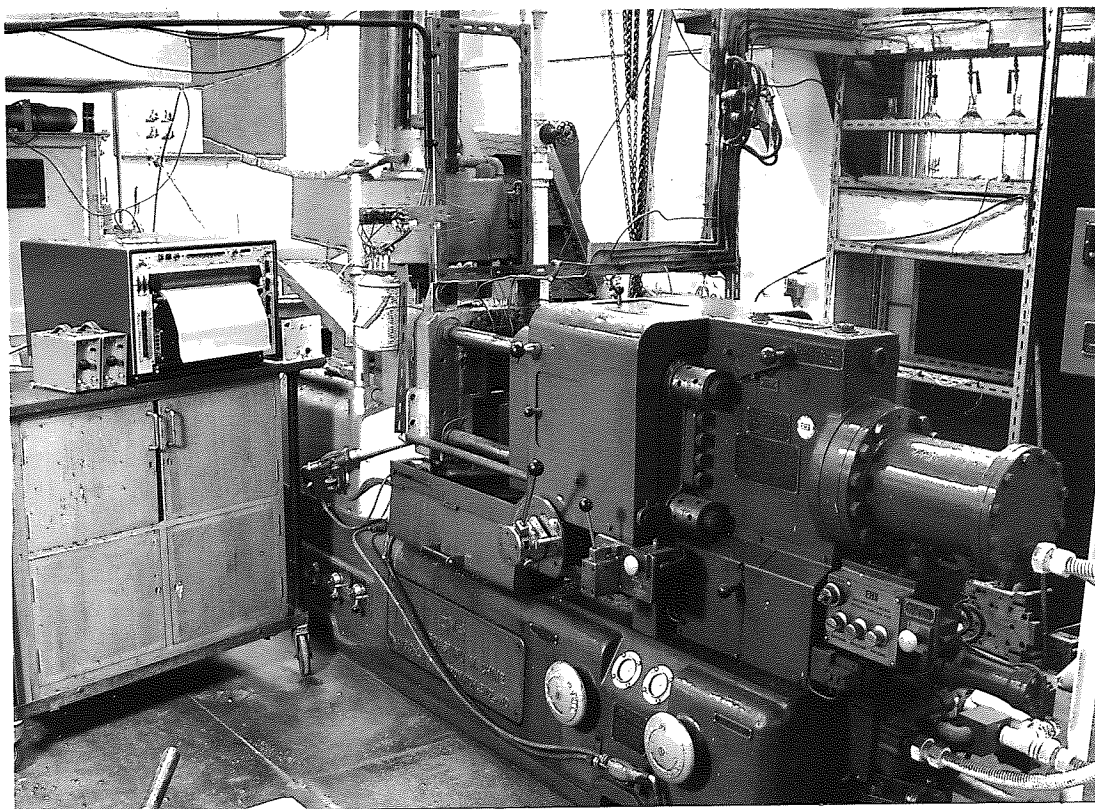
GENERAL VIEW DIECASTING MACHINE AND INSTRUMENTATION
